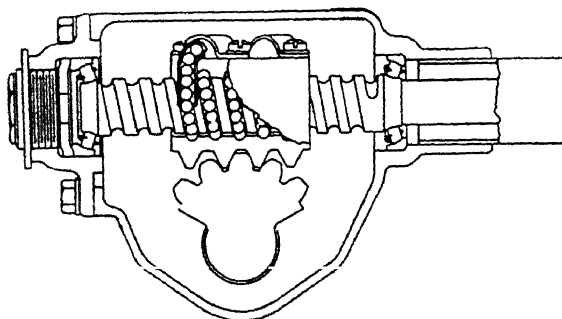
Continuous Ball Bearing Type of Steering Gear.
